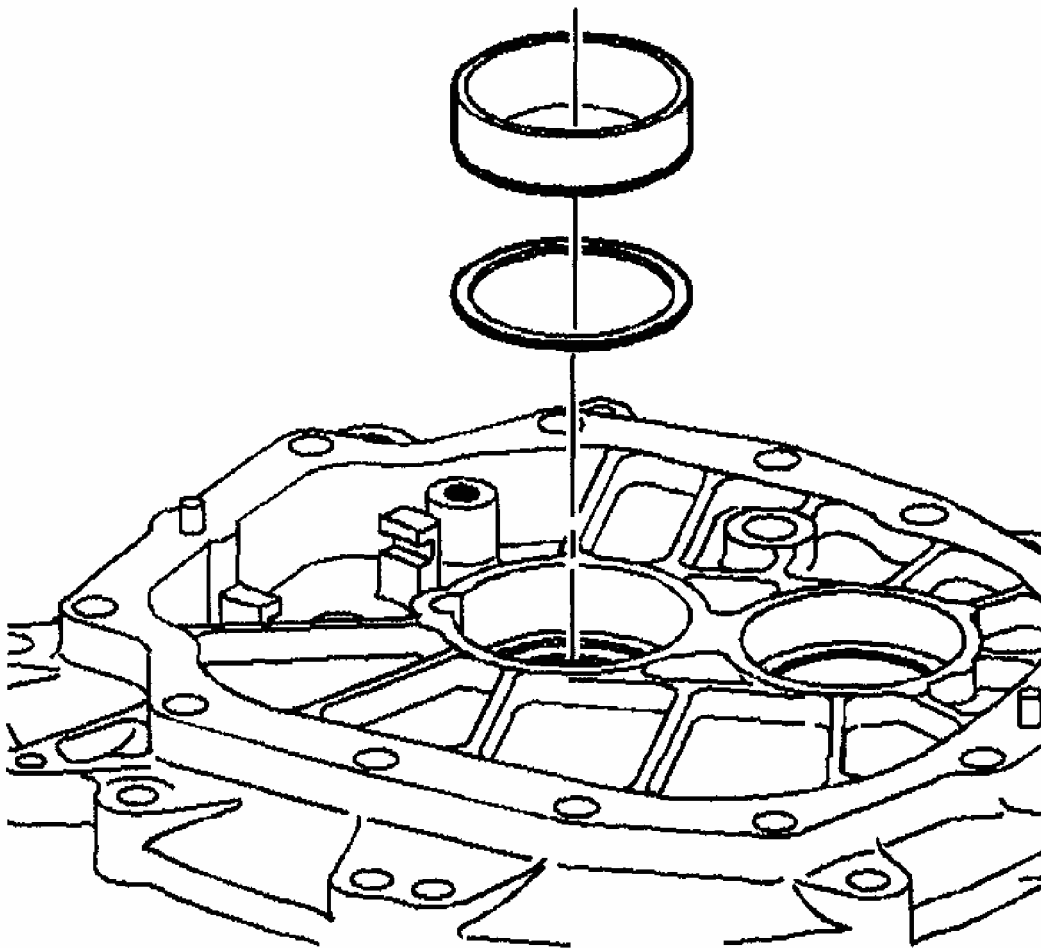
Installing Countershaft Bearing Shim And Bearing Race
